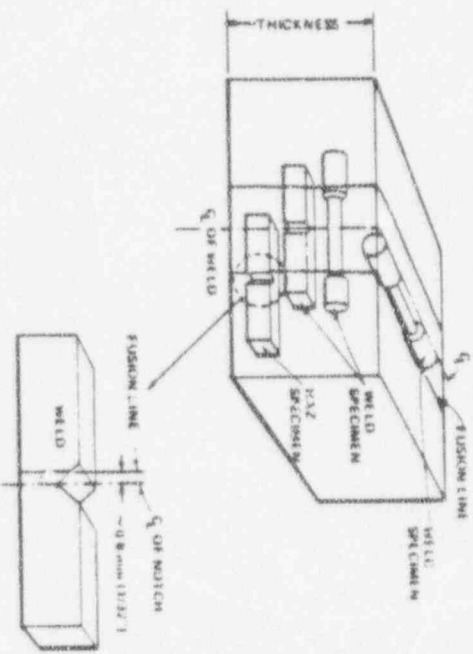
Location of Test Specimens Within Weld and Heat-Affected Zone (HAZ) Test Material
